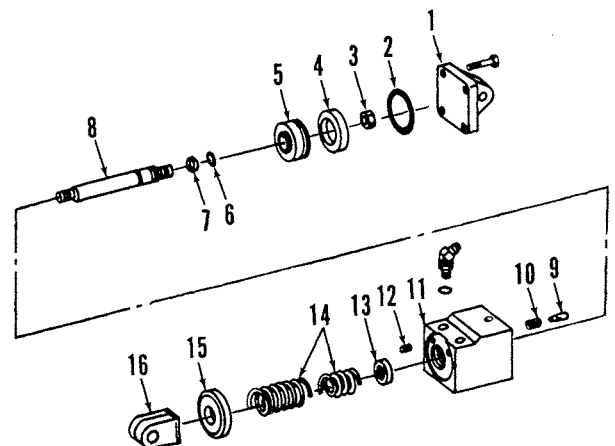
Exploded view of draft sensing cylinder used on Models 4650 and 4850.
